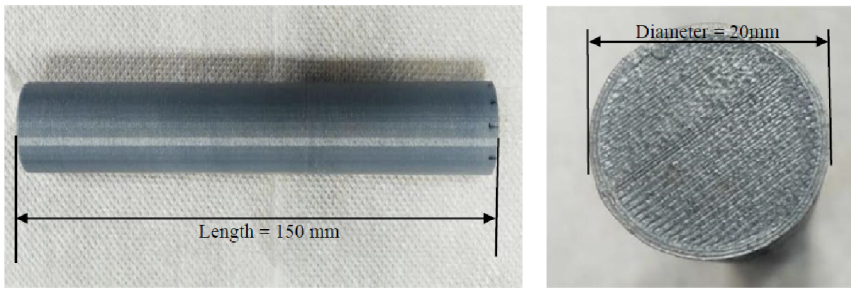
Fused deposition modeling (FDM) fabricated cylindrical rod with dimensions
